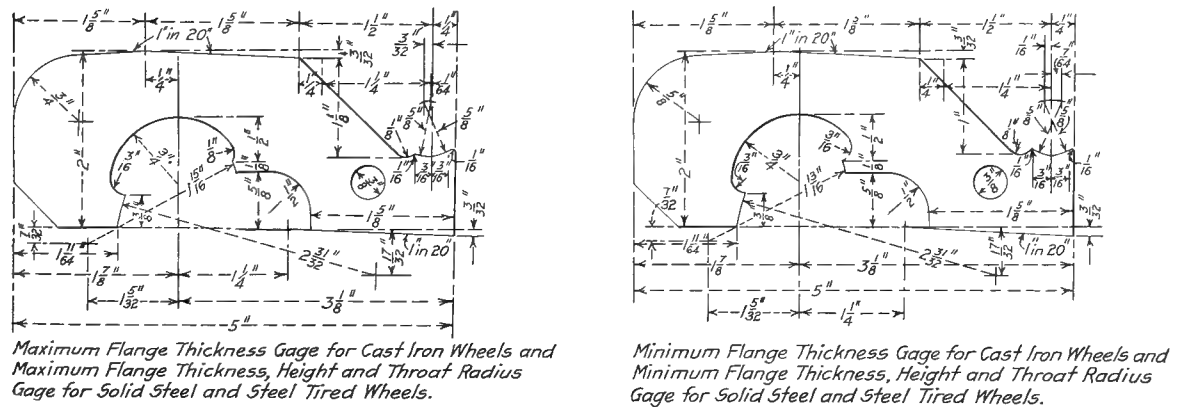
Standard Flange Thickness Gages. (M. C. B. Sheet 16.)
